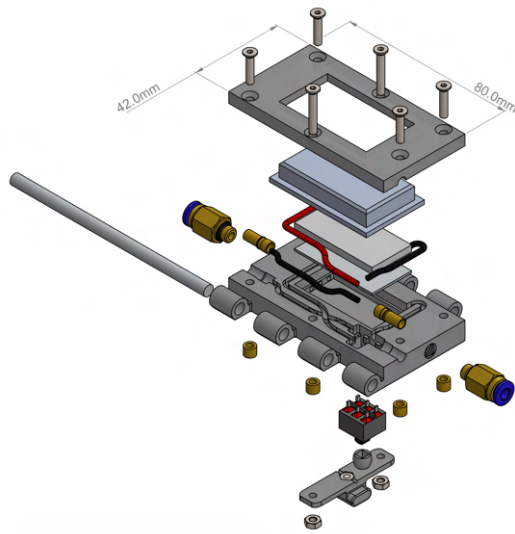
EXPLODED VIEW OF THE TRACK LINK AND COMPONENTS.
